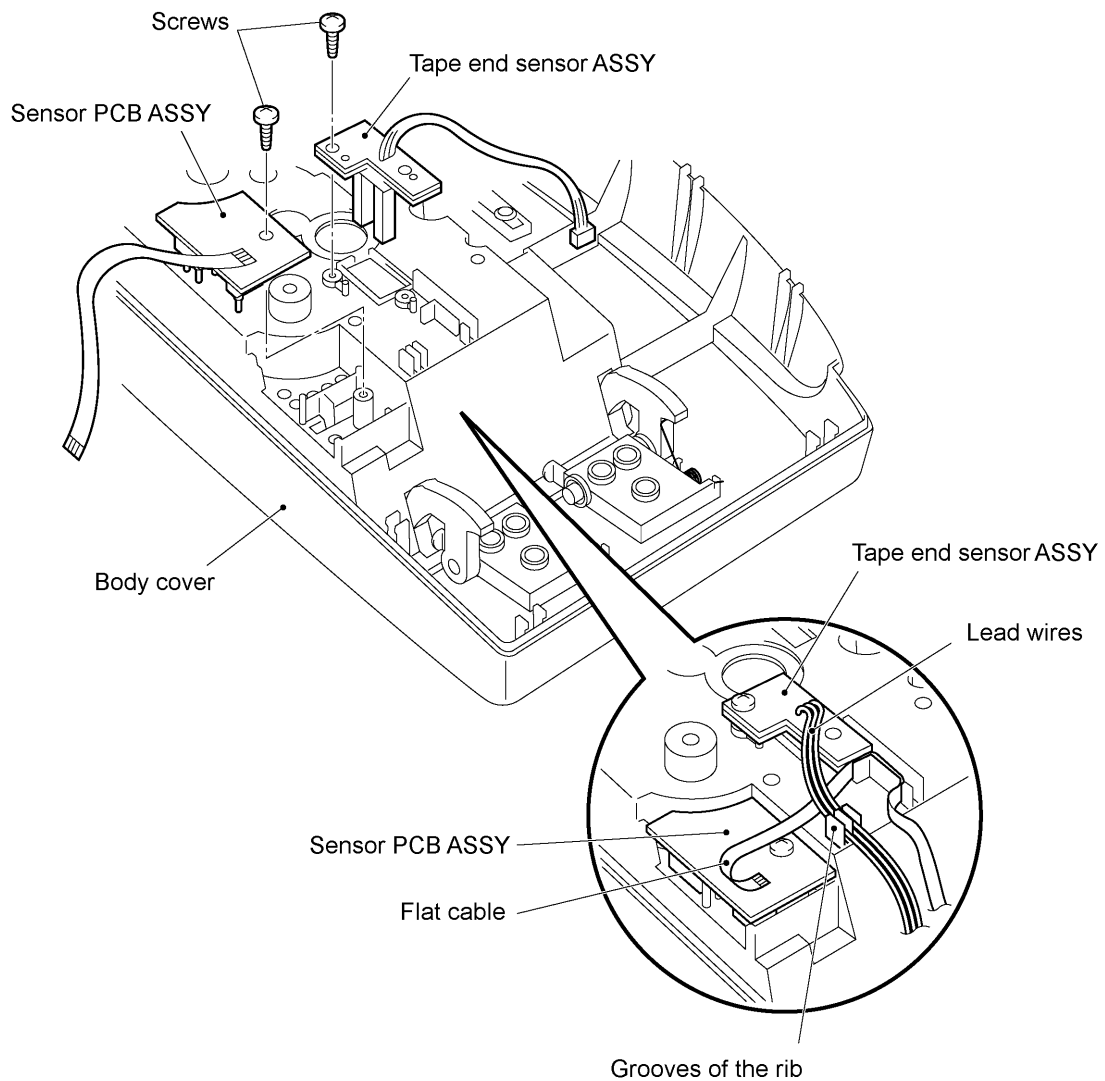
Installing the Sensor PCB ASSY and Tape End Sensor ASSY
